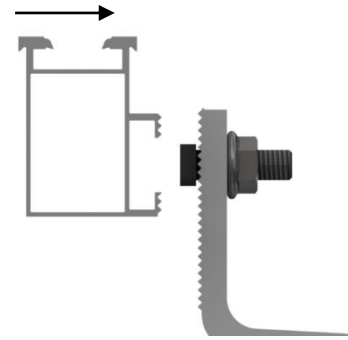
Inserting the T-head Bolt to the Rail Side Channel
